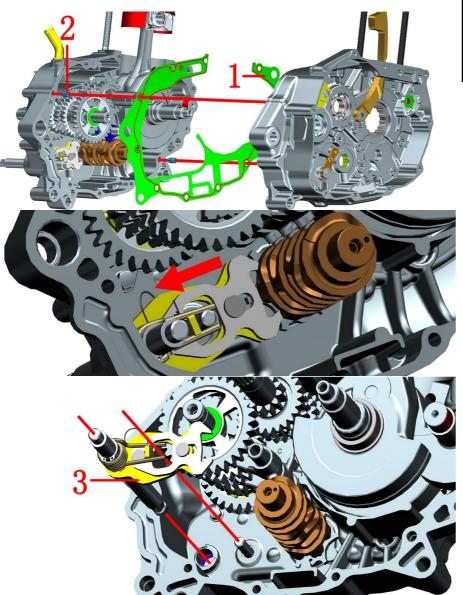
CRANKCASE		Crankcase disassembly-2	CHK	Q
